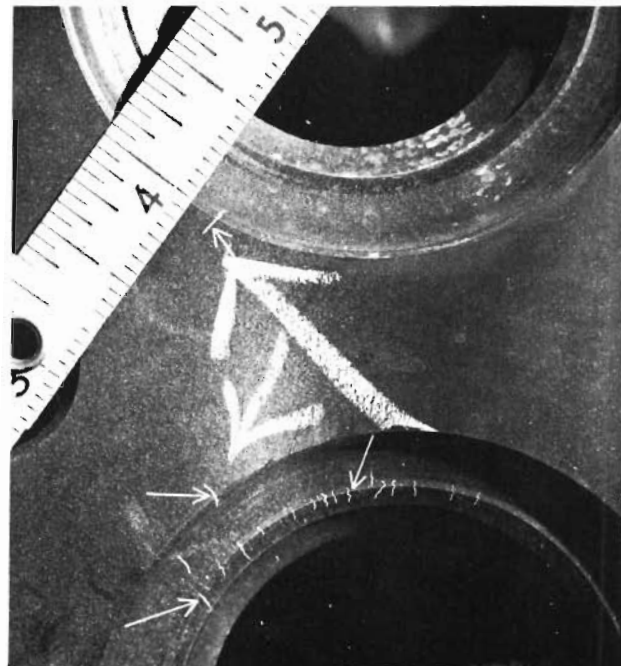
Magnaflux Indication Of Cracks On Valve Face
